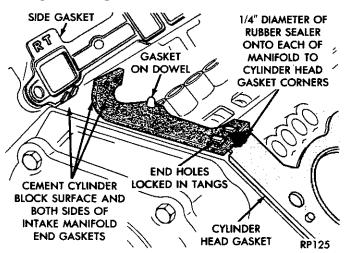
Intake Manifold END Sealing-3.9L Engine
